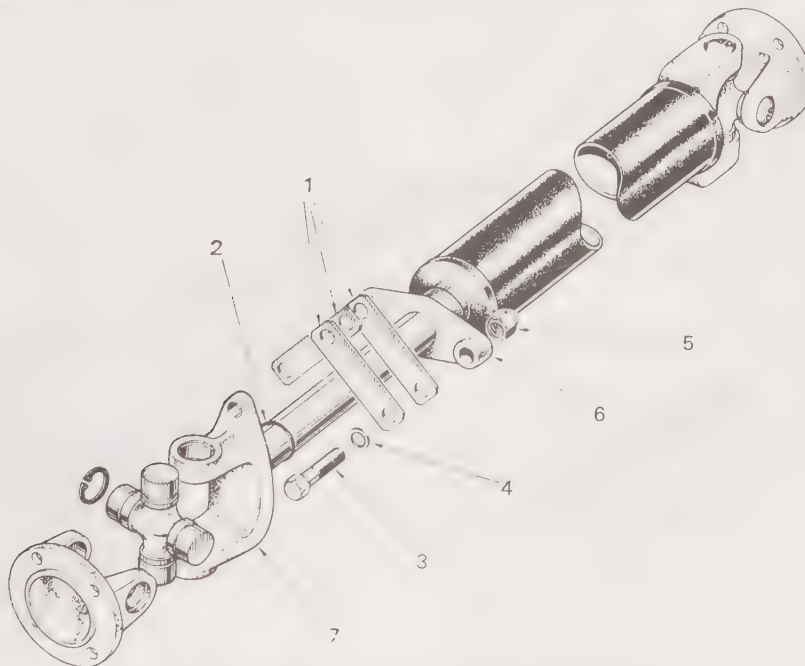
14 Exploded arrangement of strap drive propeller shaft.
